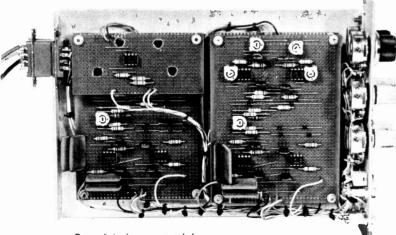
Front panel component assembly and wiring with details of mounting and disposition of boards on the module support plate. The small ringed X at the board edges indicates orientation. (See board details)
